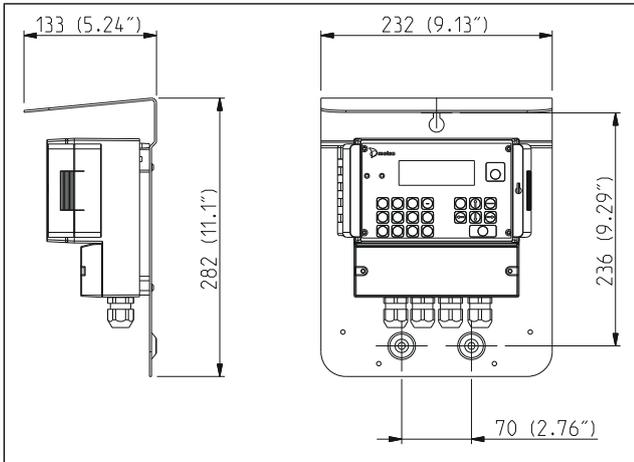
Mounting dimensions of TCU, BD model of the transmitter (K09173).
